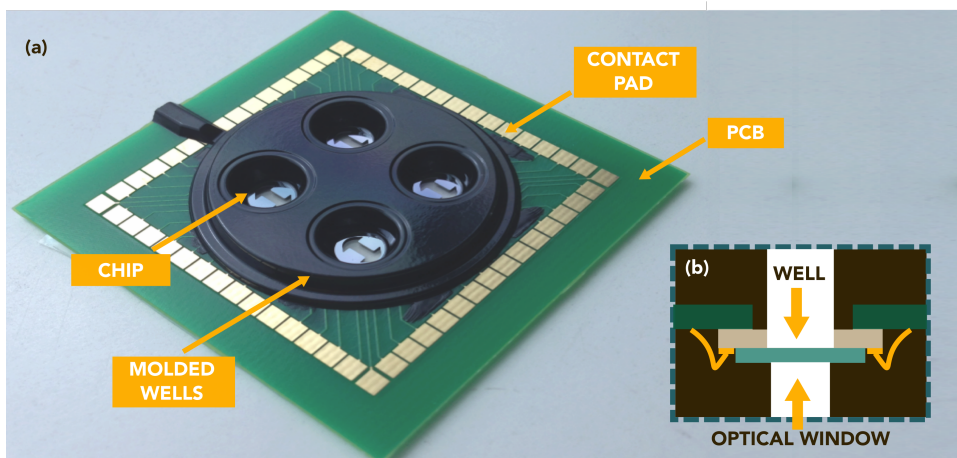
Optical image of the multi-well plate consisting of four Cytostretch chips mounted on a PCB and encased by the molded wells. (b) 2D sketch of the plate cross-section.
